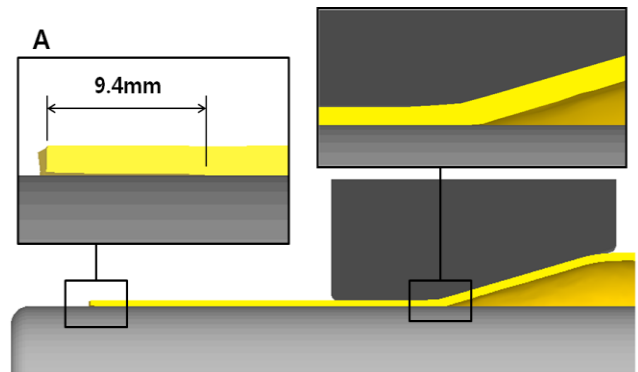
The cross-sectional geometry after the rotary swaging process using mandrel
